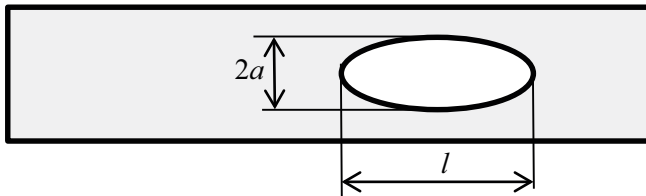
Schematic of a crack-like internal defect. This defect has length l and defect depth $2a$ (defect shape = $l/2a$).
